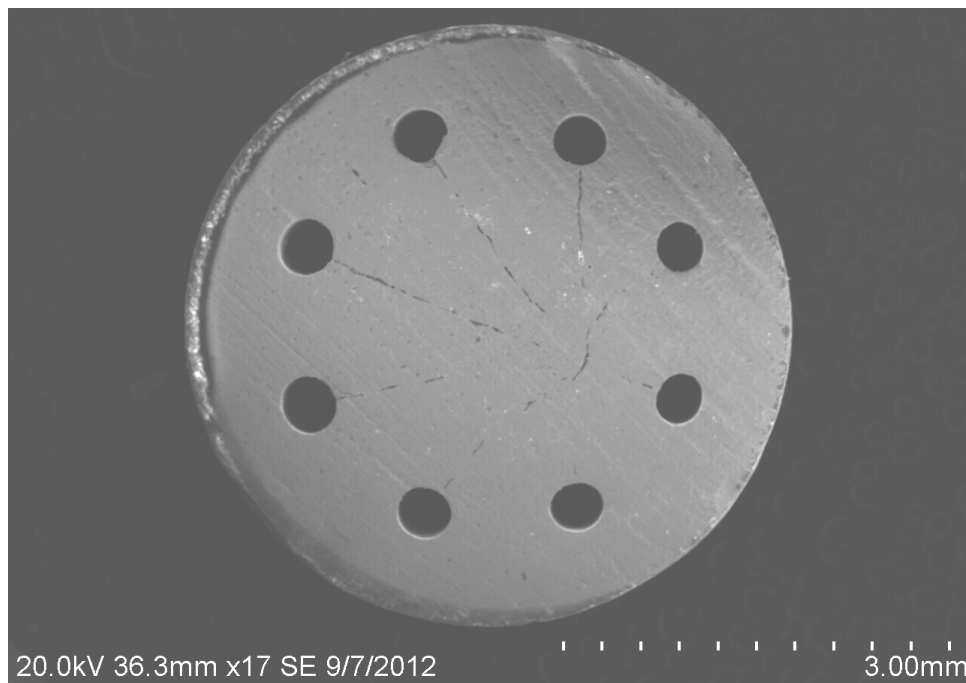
Alumina substrate showing cracks between outer wiring holes.
